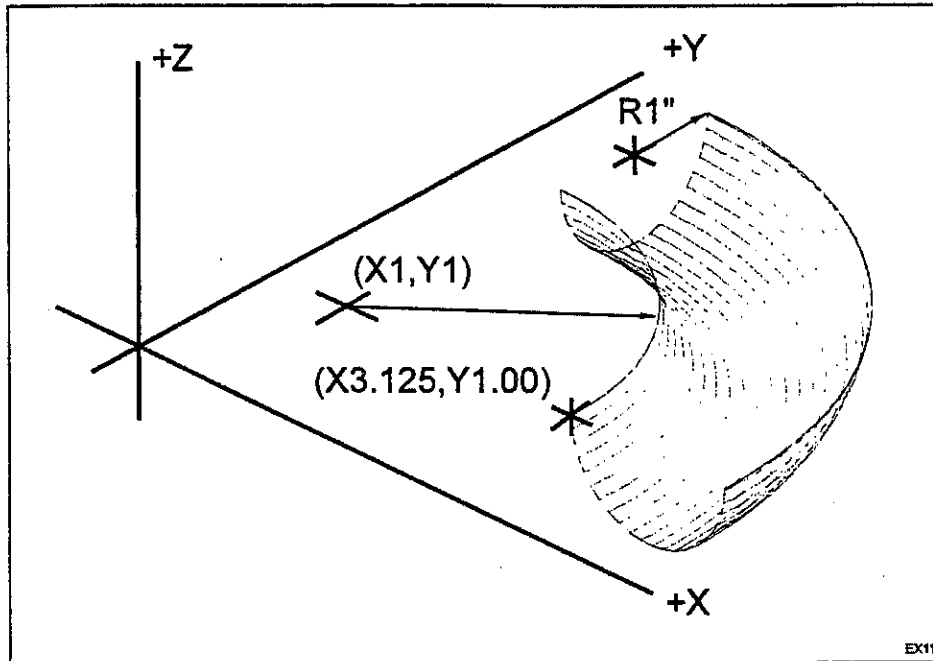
13, Layout for Sample Program #10, Elbow Milling
